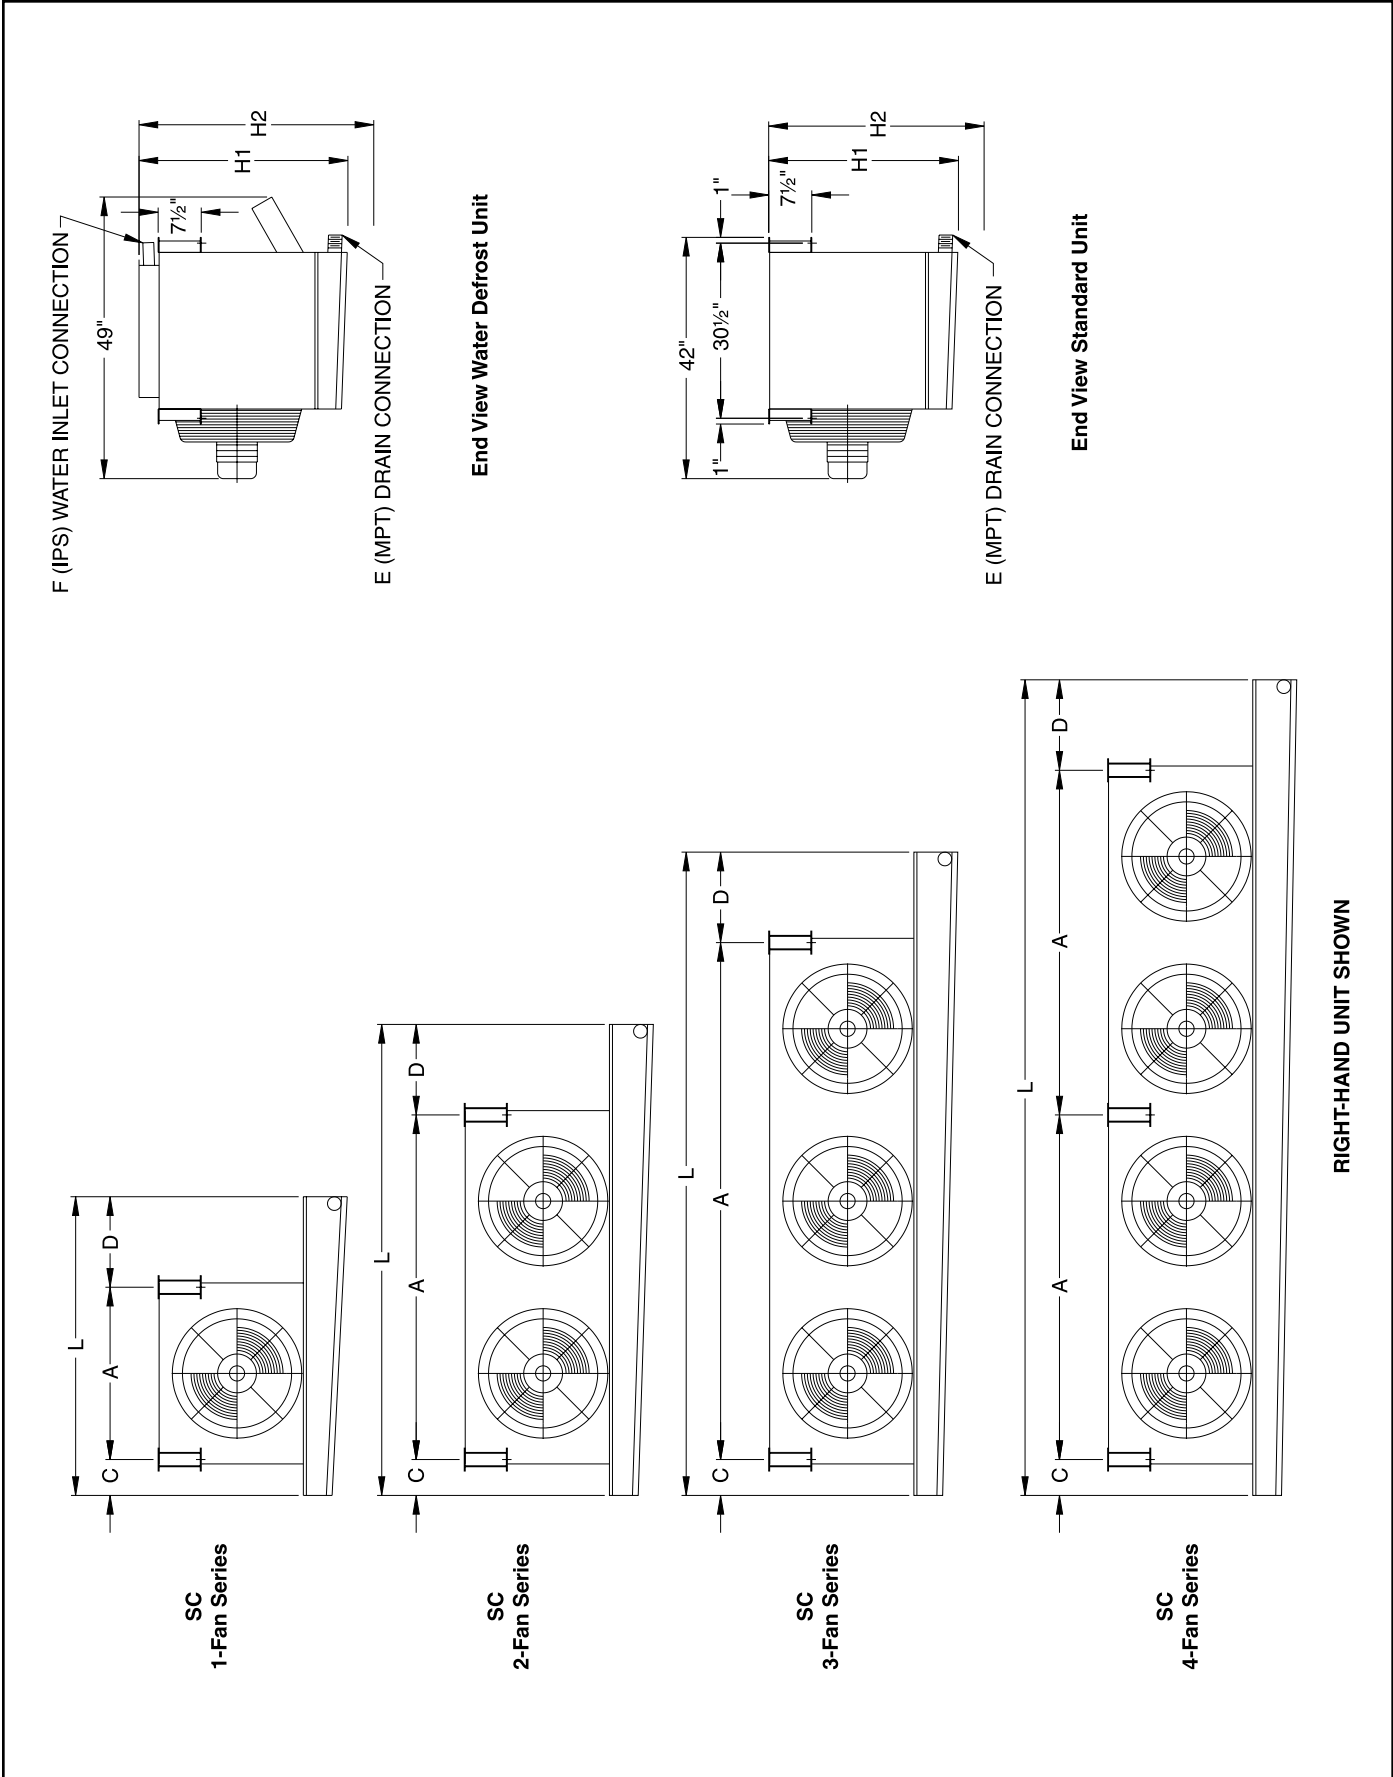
Dimensional Drawing for 1-Fan through 4-Fan Units
